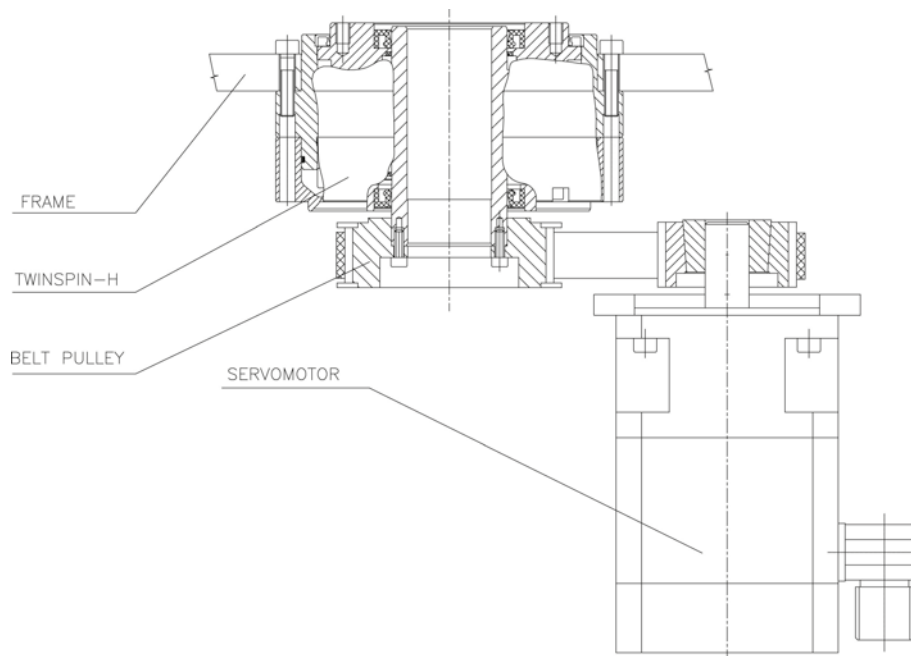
Connection of gear shaft with toothed belt by the screw joint
